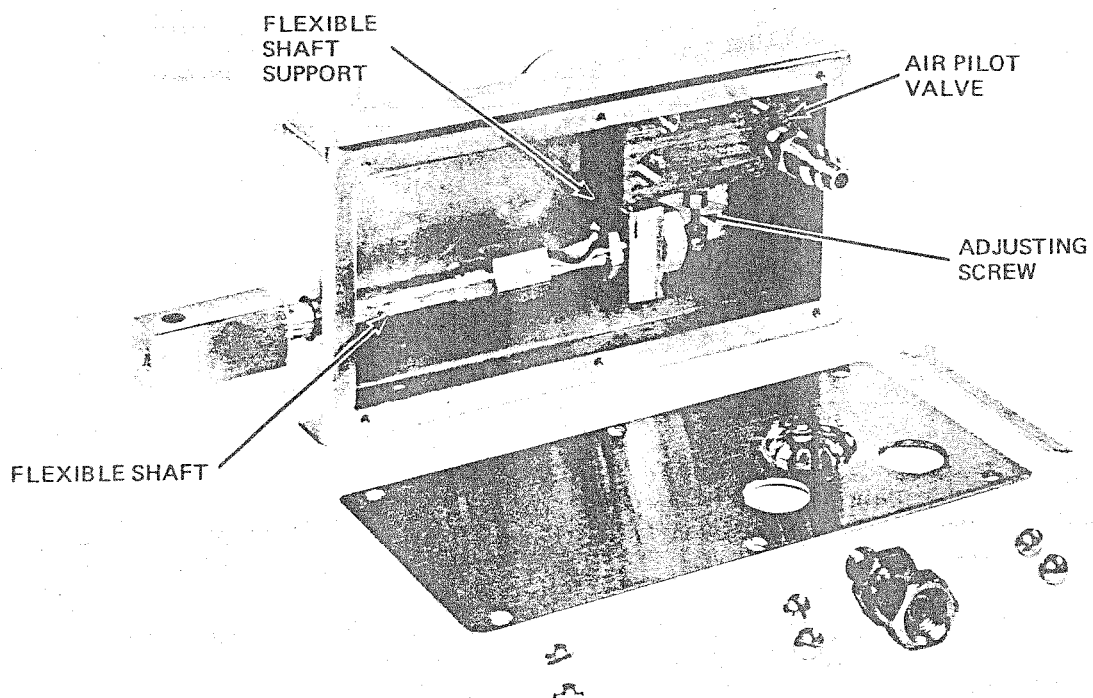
Model 30-103 and 30-104 Level Control - Disassembled
